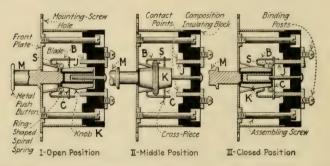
Reciprocating-blade-mechanism switch for automobile lighting. (Cutler Hammer Mfg. Co.)
